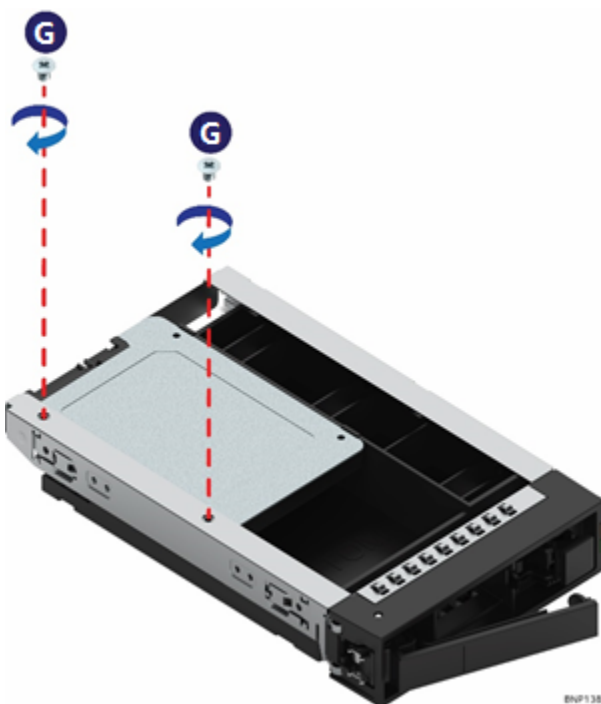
3.5" Drive Carrier to 2.5" SSD Bracket – Secure SSD to Carrier
